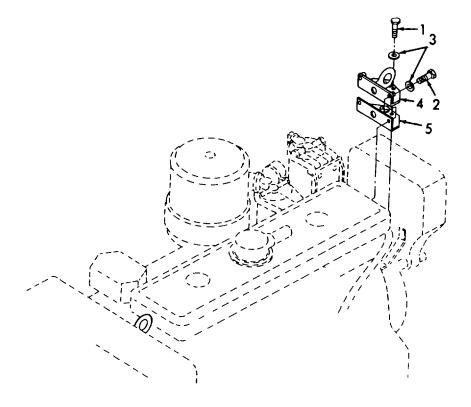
Engine Lifting Brackets, Removal/Installation.
